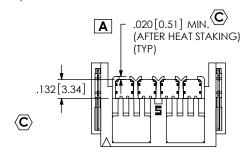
(IP5-04-01-L-S-XXX-L SHOWN) (SAME AS FIG. 1, EXCEPT AS SHOWN)
